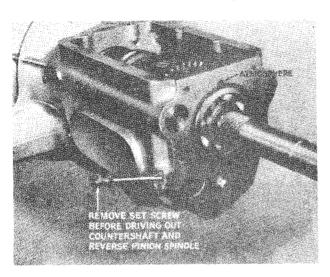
Countershaft and Reverse Locating Setscrew partially withdrawn.
